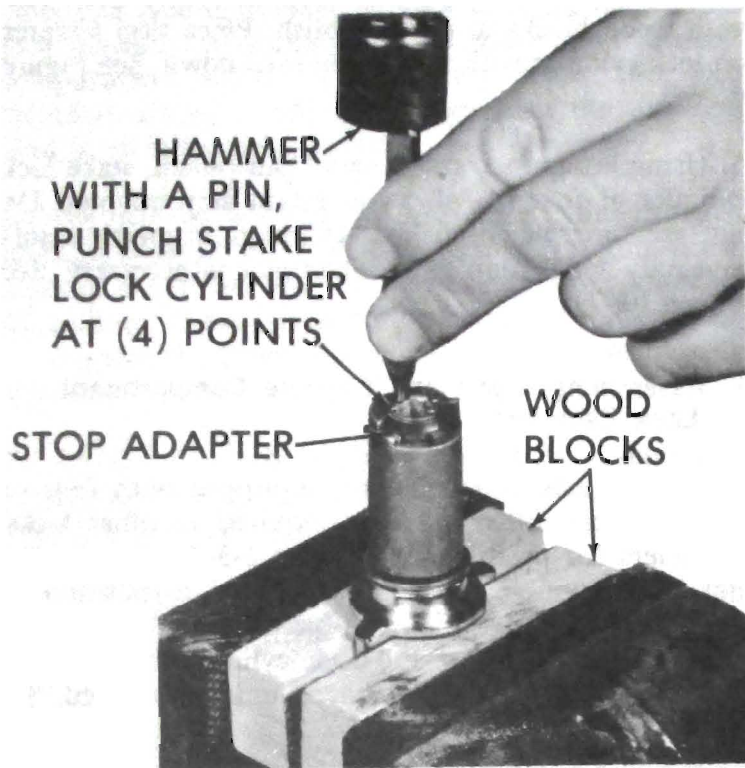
Staking Lock Cylinder to Retain Lock Adapter
